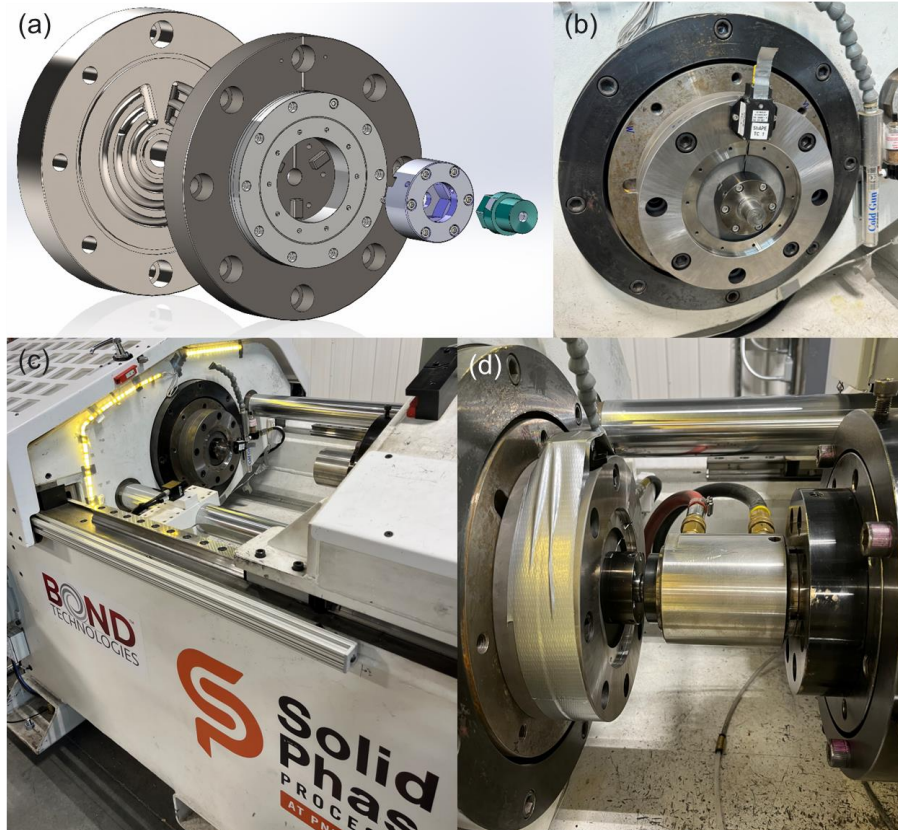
(a) Design of water-cooled mounting plates, tool holder, and die for extrusion of longer ODS steel wire, (b) & (c) Assembly of water-cooled mounting plates, tool holder, and die on ShAPE machine, (d) Experimental setup of ShAPE for extrusion of longer ODS steel wire
